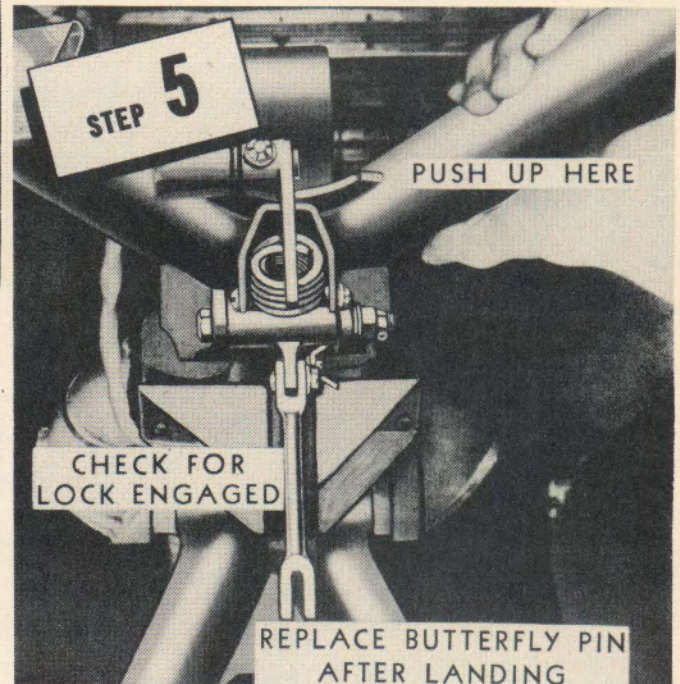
Emergency Lowering of Nose Landing Gear (Sheet 2 of 2 Sheets)
